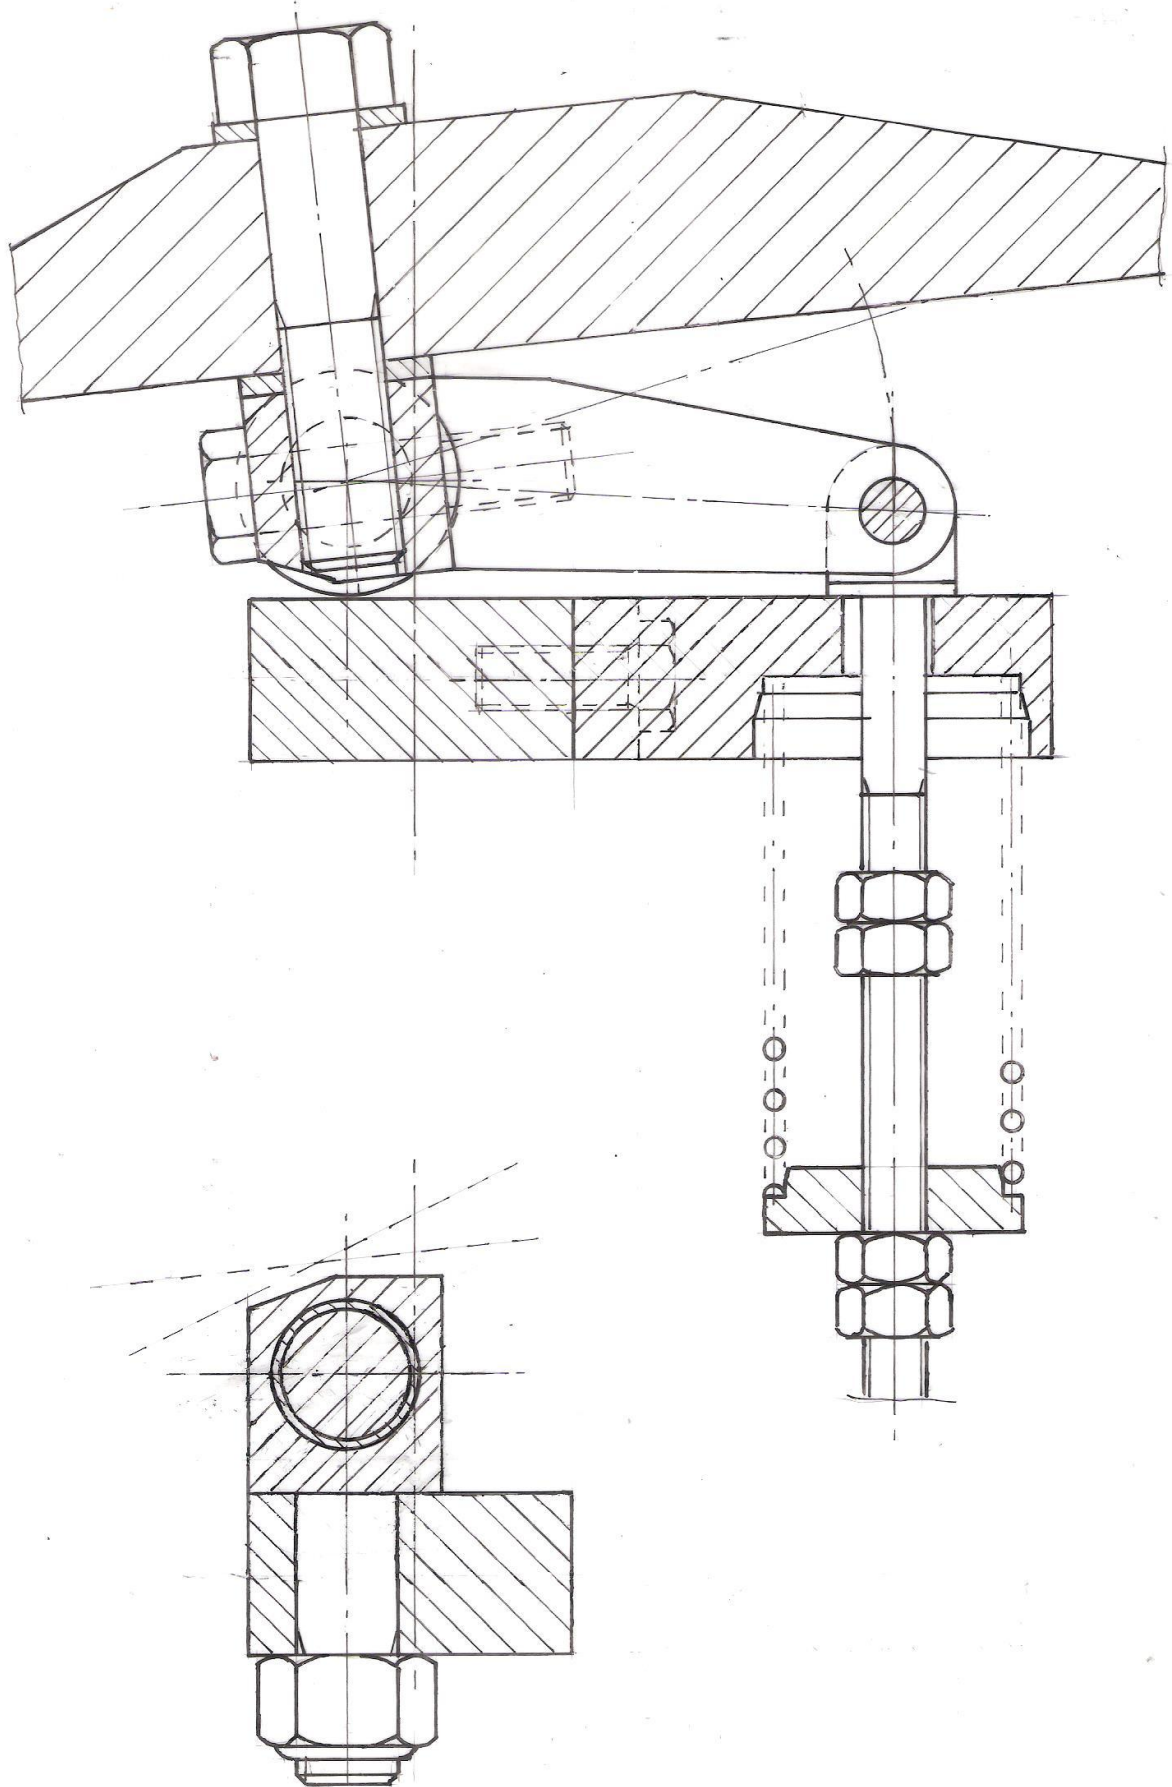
Connection of the blade shaft to the blade and of the bearing houses to the connecting strip
